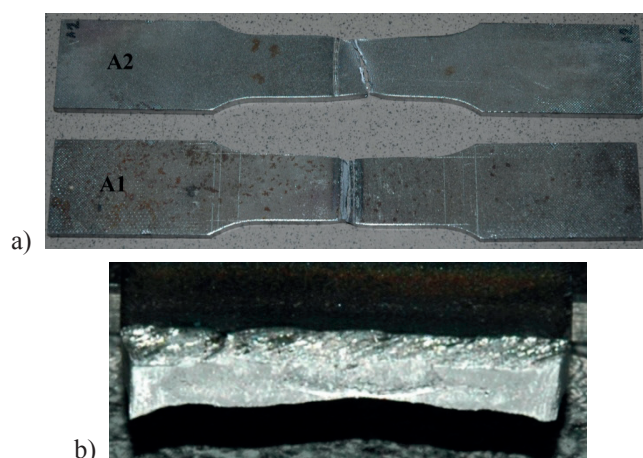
A view of the broken samples from the tensile tests of butt joint A welded at 3.3 kW and welding speed of 1.5 m/min (heat input of 132 J/mm, Table 6) (a) and an optical micrograph of the fracture surface (delamination can be observed) (b)
